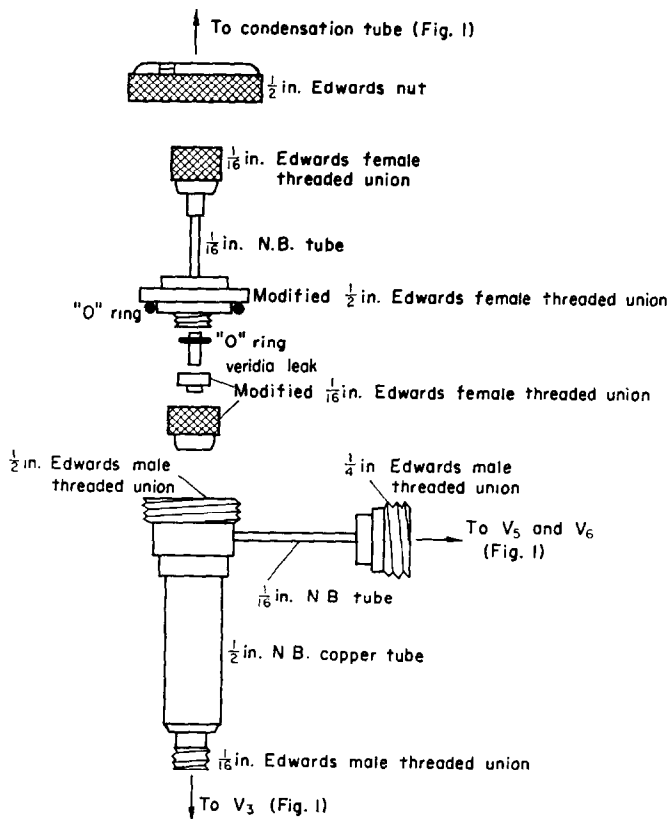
Sample inlet leak assembly (exploded diagram).
